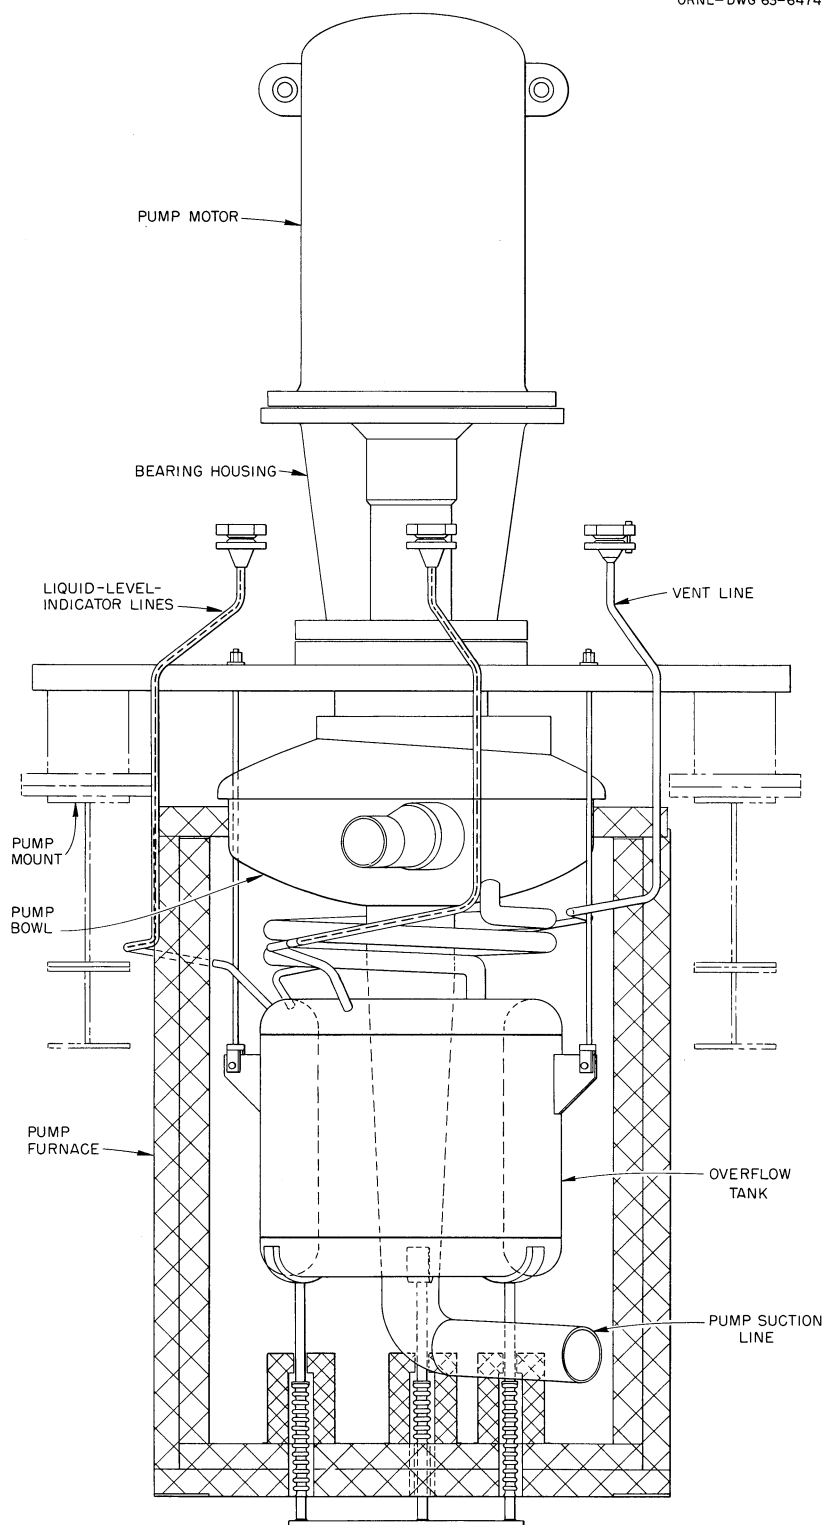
Fuel Pump and Overflow Tank Assembly.
